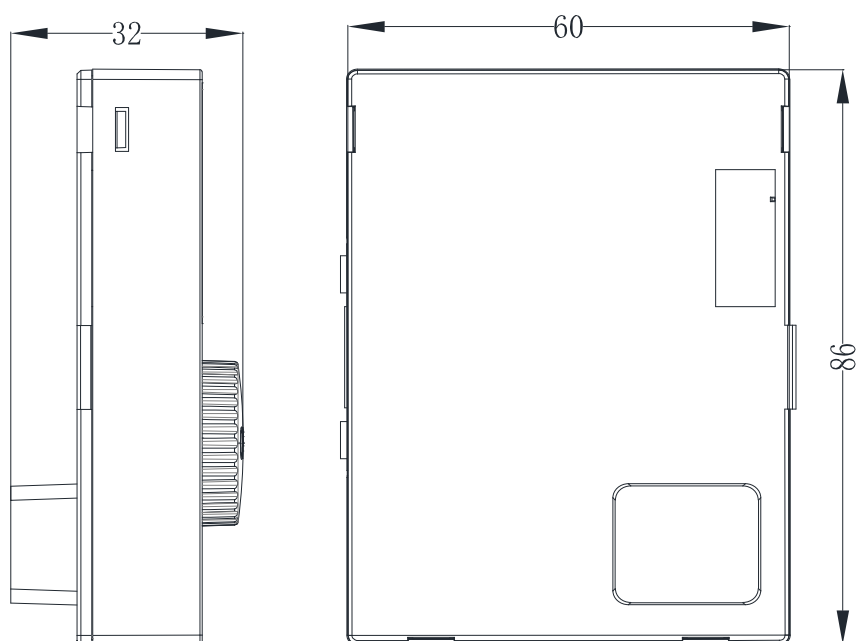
Extension Operation Panel Bracket Appearance and Dimension (mm)
